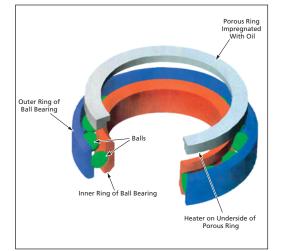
A Porous Ring impregnated with oil is attached to one of the ball-bearing rings. When the porous ring is heated, some oil is squeezed out. The oil then spreads over the bearing surface and eventually reaches the bearing/race contacts.
